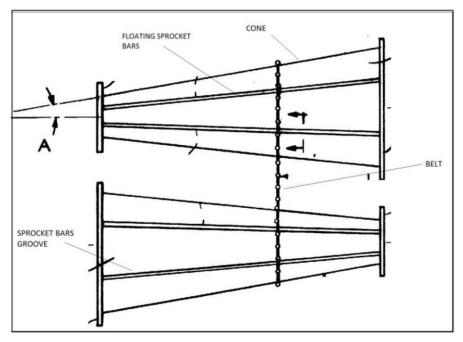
Schematic View of the Primary Elements of Improved Transmission
